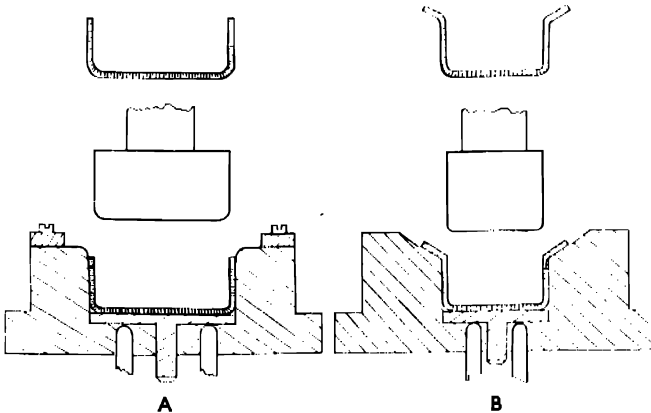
Single-action re-drawing to produce flanged shell, A and B.
